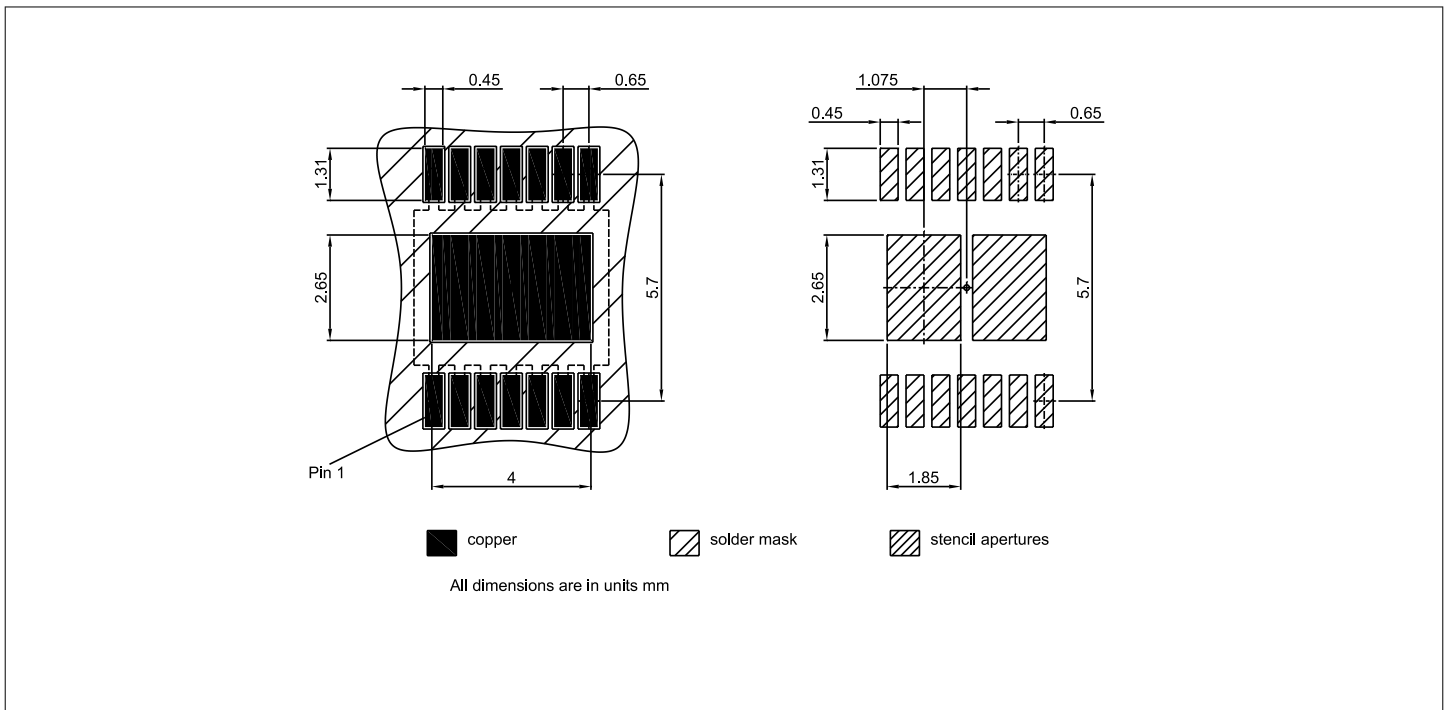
PG-TSDSO-14 dual small outline footprint dimensions
